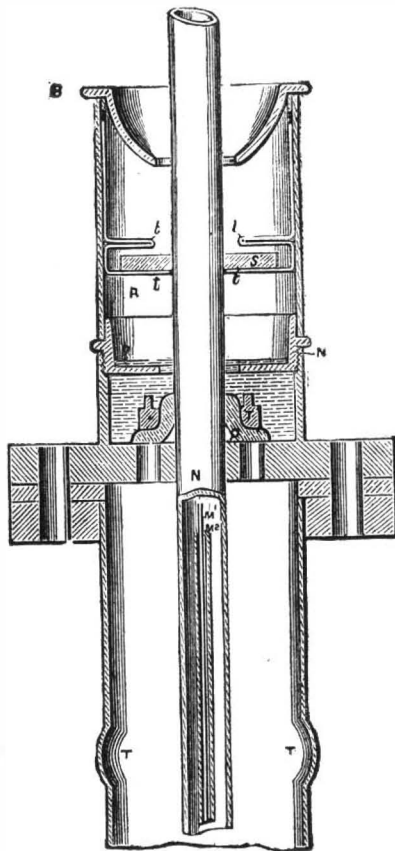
ENLARGED SECTIONAL ELEVATION OF AIR PUMP
